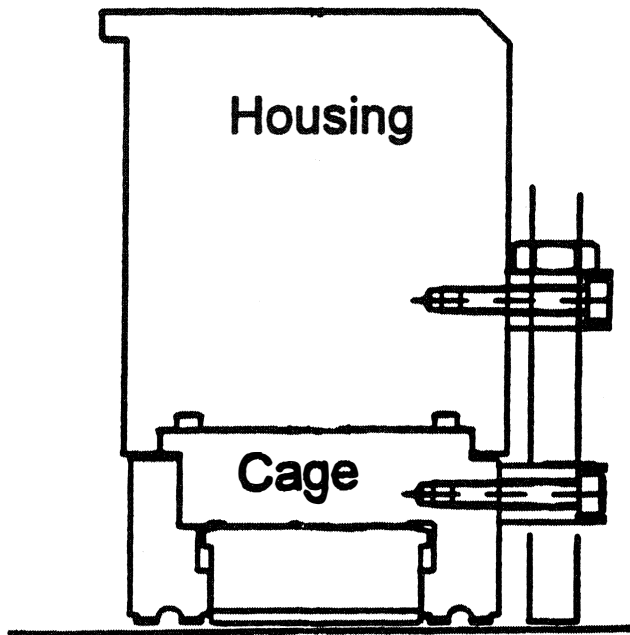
Cross Sectional Drawing Showing Details of SFD Bearing.
